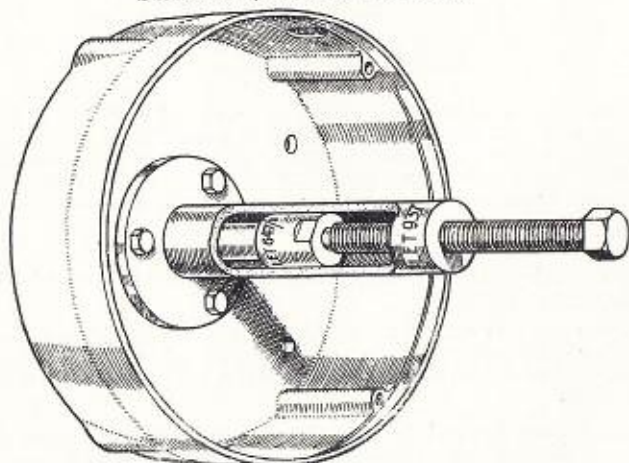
Service Tool No. LET 937 and Protector LET 647/1. drawing flywheel housing and bearings from shaft.
